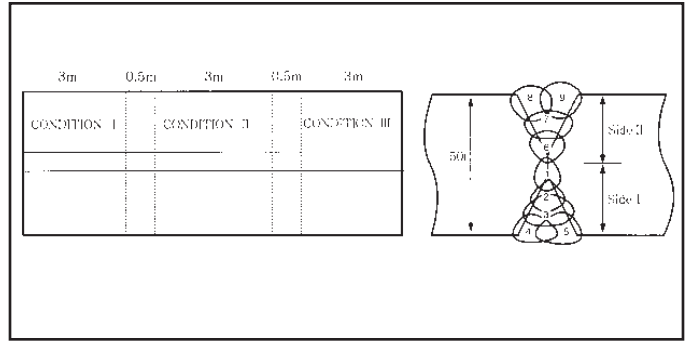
Schematic diagram of the weld deposit metal for the SAW process.
